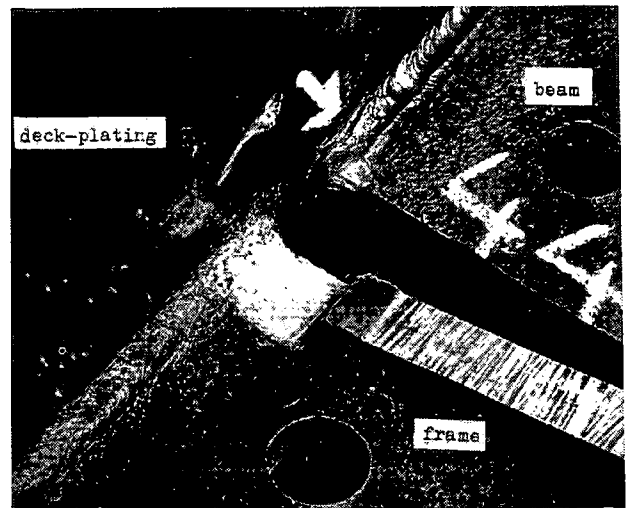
Crack in end-weld, connecting beam to deck-plating (dynamic tension; point E' of no. 44)
